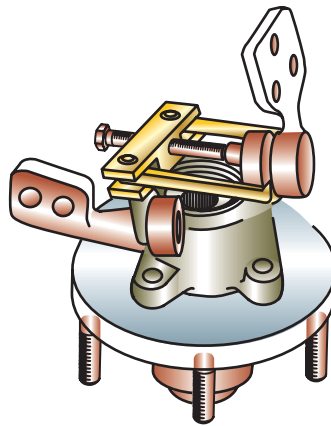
Removing the outer tie-rod end from the steering knuckle.
